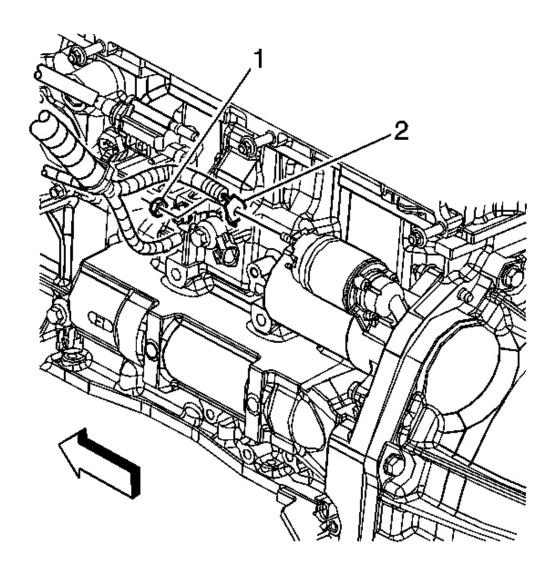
Starter Wiring (1 of 2) Courtesy of GENERAL MOTORS CORP.
